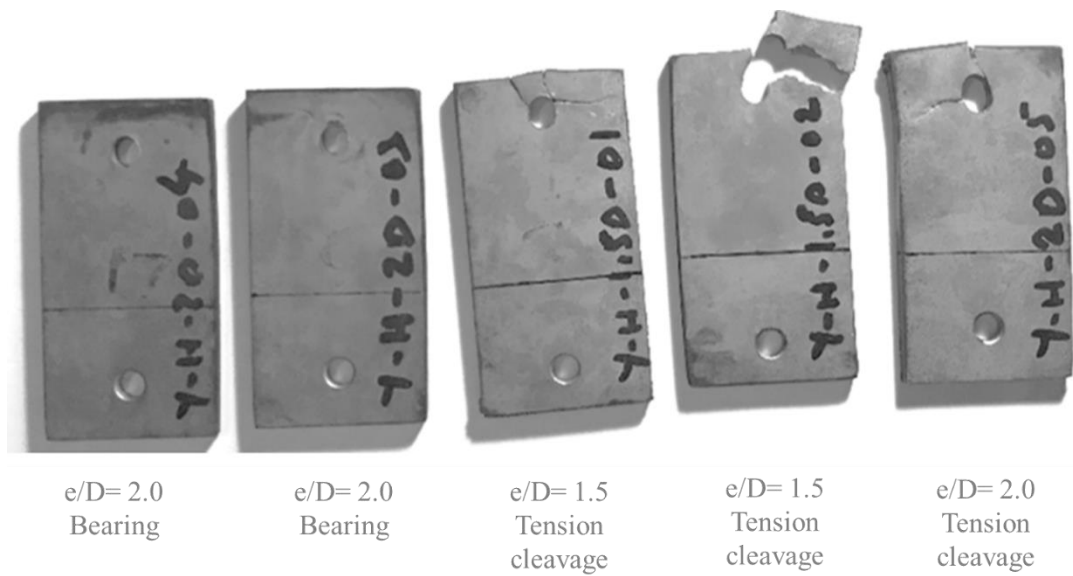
HIP post-treated T build direction pin-bearing test specimens after fracture.
